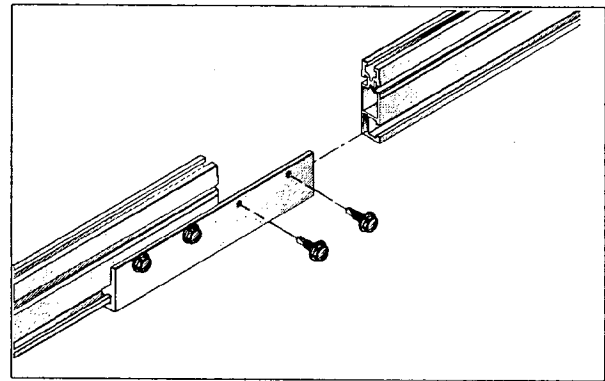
Splice bars slide into the footing bolt slots of SolarMount rail sections.
